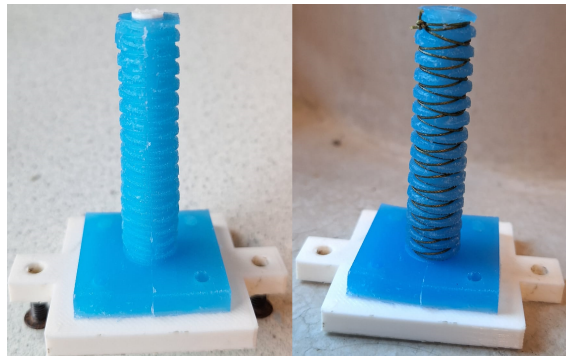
Inner part of the actuator on the mount used in the moulds. Clearly showing the grooves in the actuator. The actuator on the right is wrapped in the fishing line.
